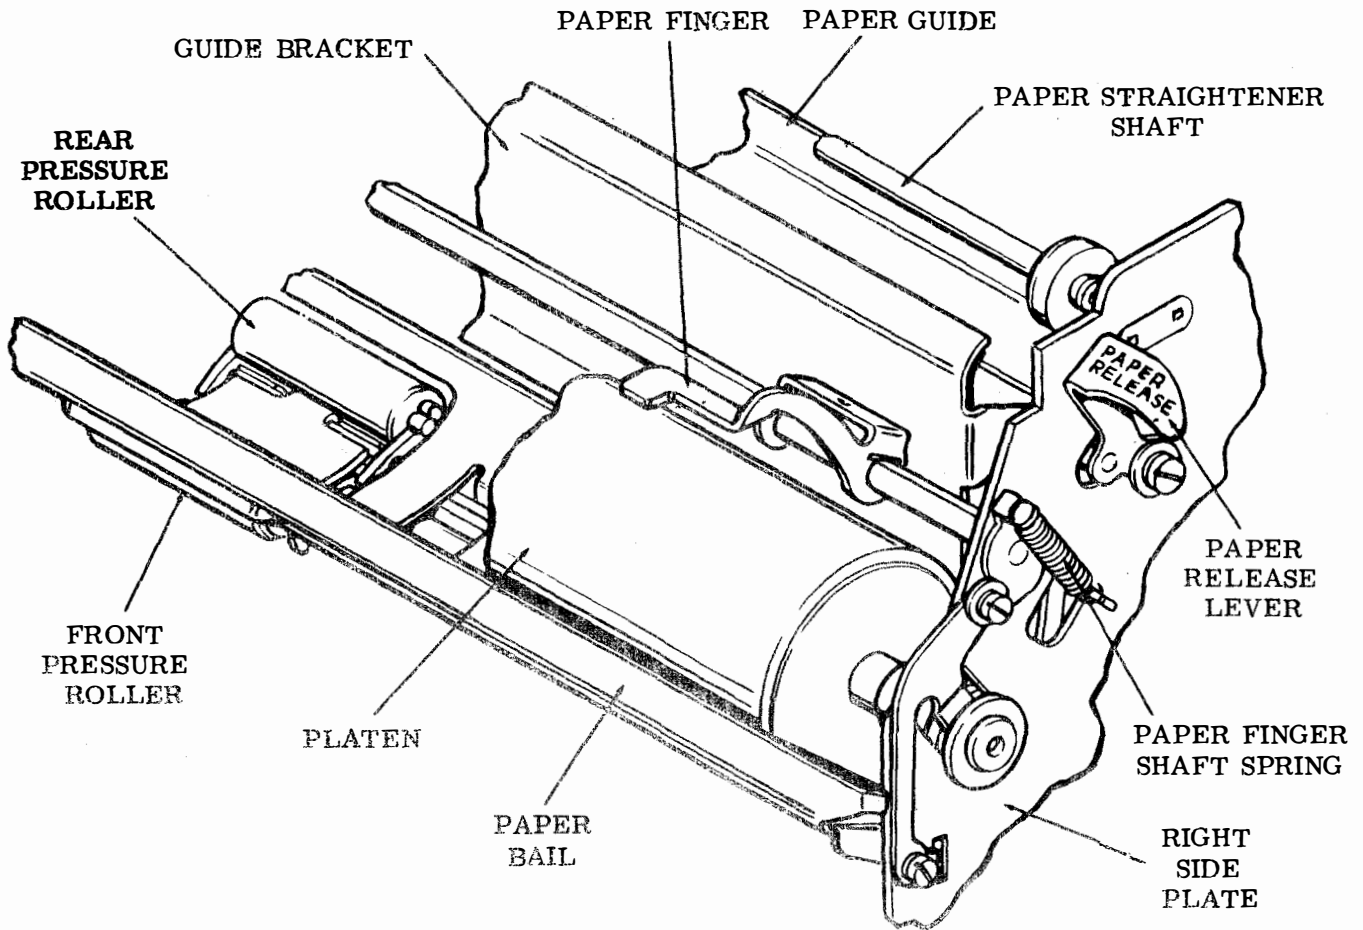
Sprocket Feed Platen Mechanism, Right Front View
